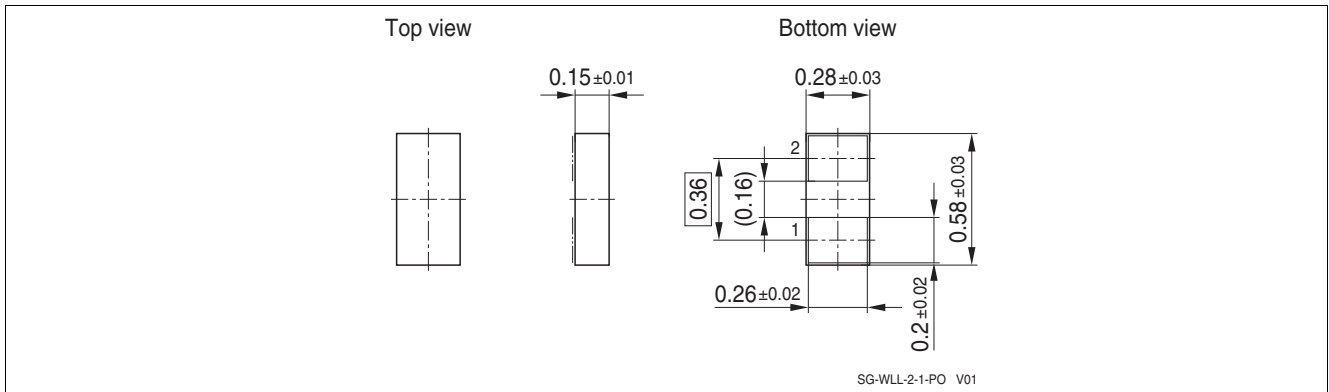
WLL-2-1 Package outline (dimension in mm)
